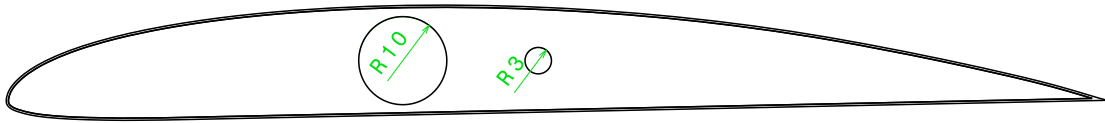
Rib sketch with the perforations to assemble both circular spar and rack-guide tube in the OMW.
